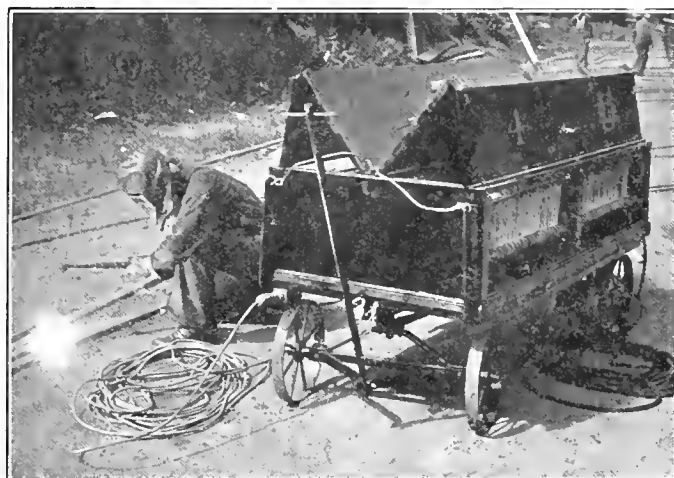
550-VOLT RAILWAY ARC-WELDING SET
